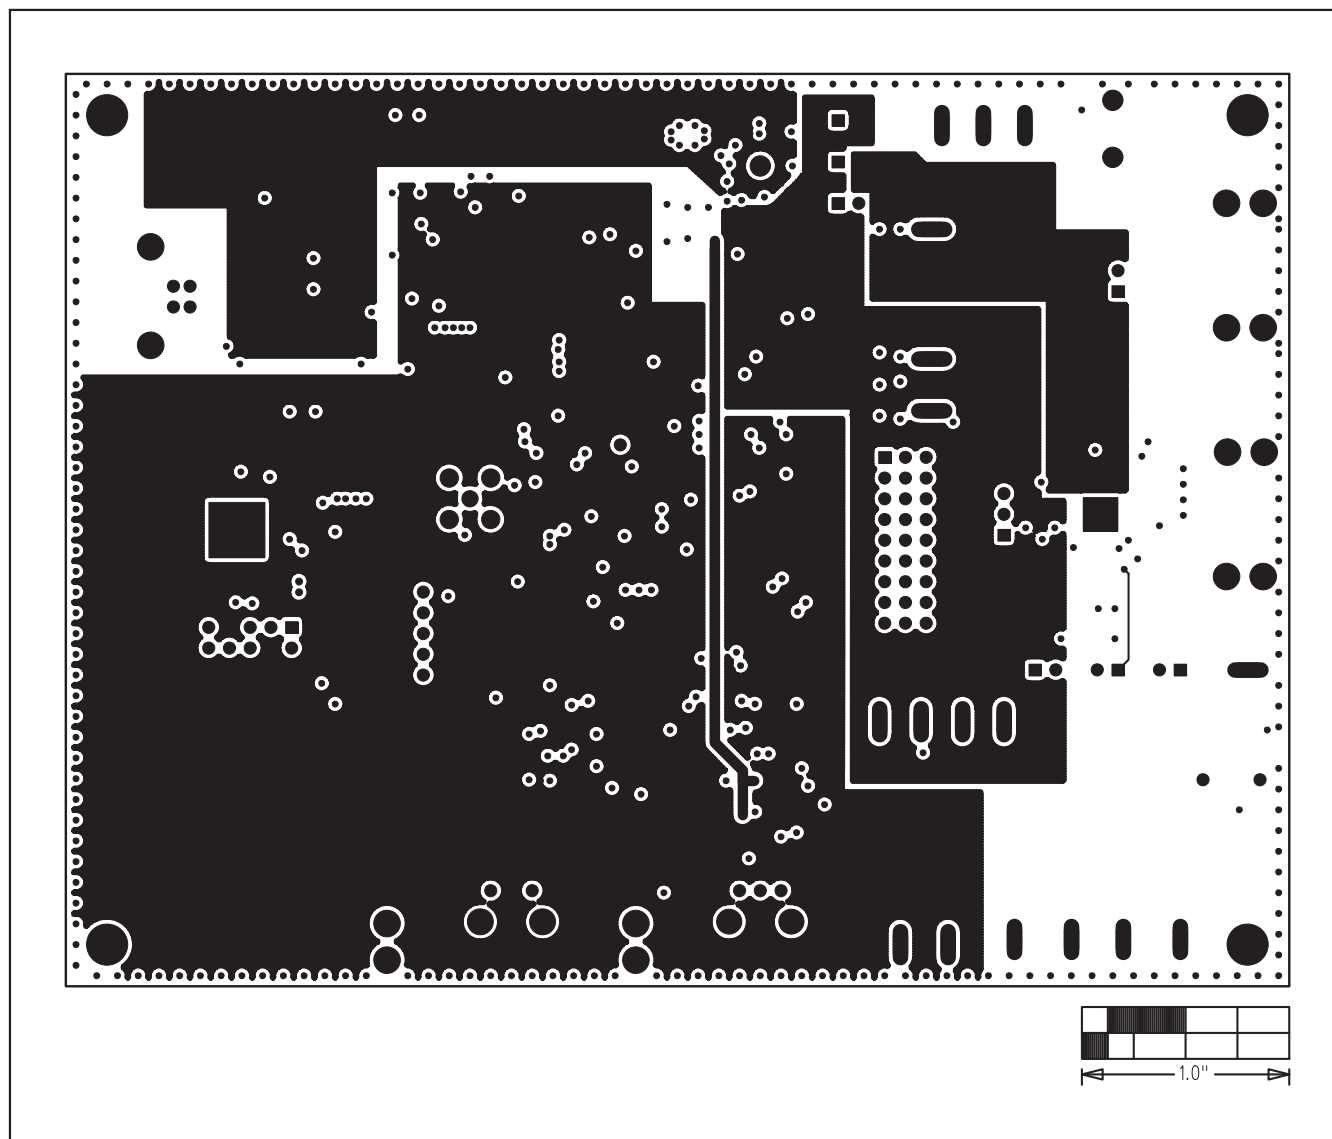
MAX9856 EV Kit PCB Layout—Inner Layer 3
